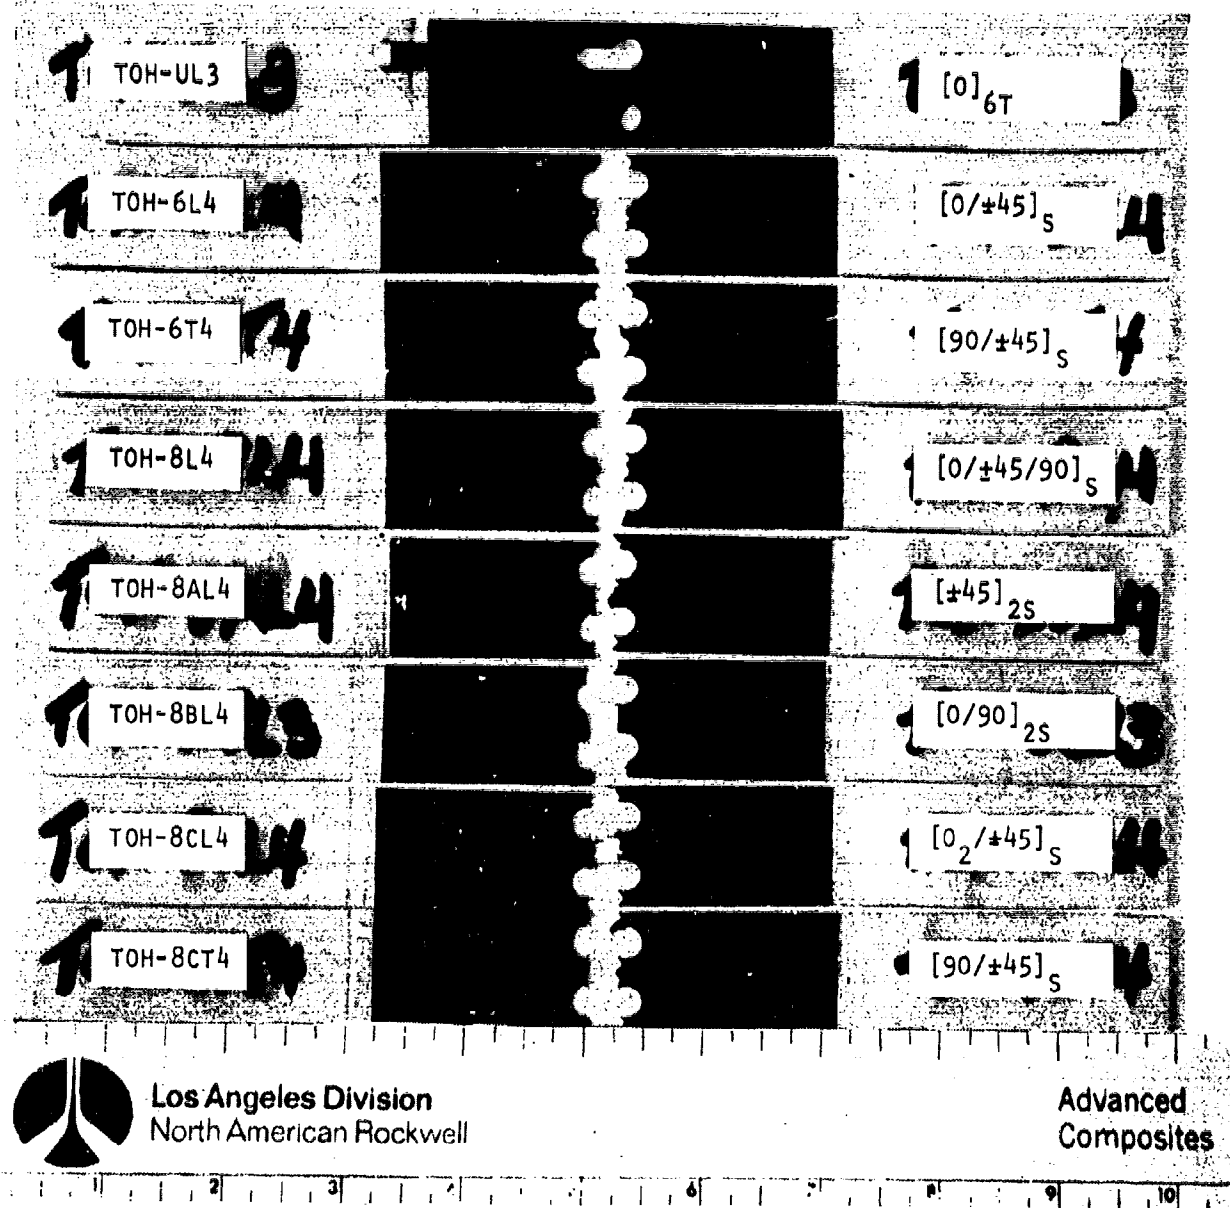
Typical Failed Open Hole Graphite/Epoxy Specimens -
